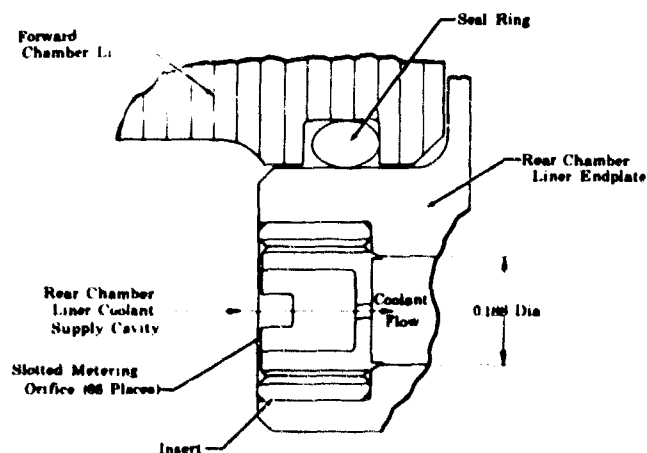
Rear Chamber Liner Coolant Metering, Side View
